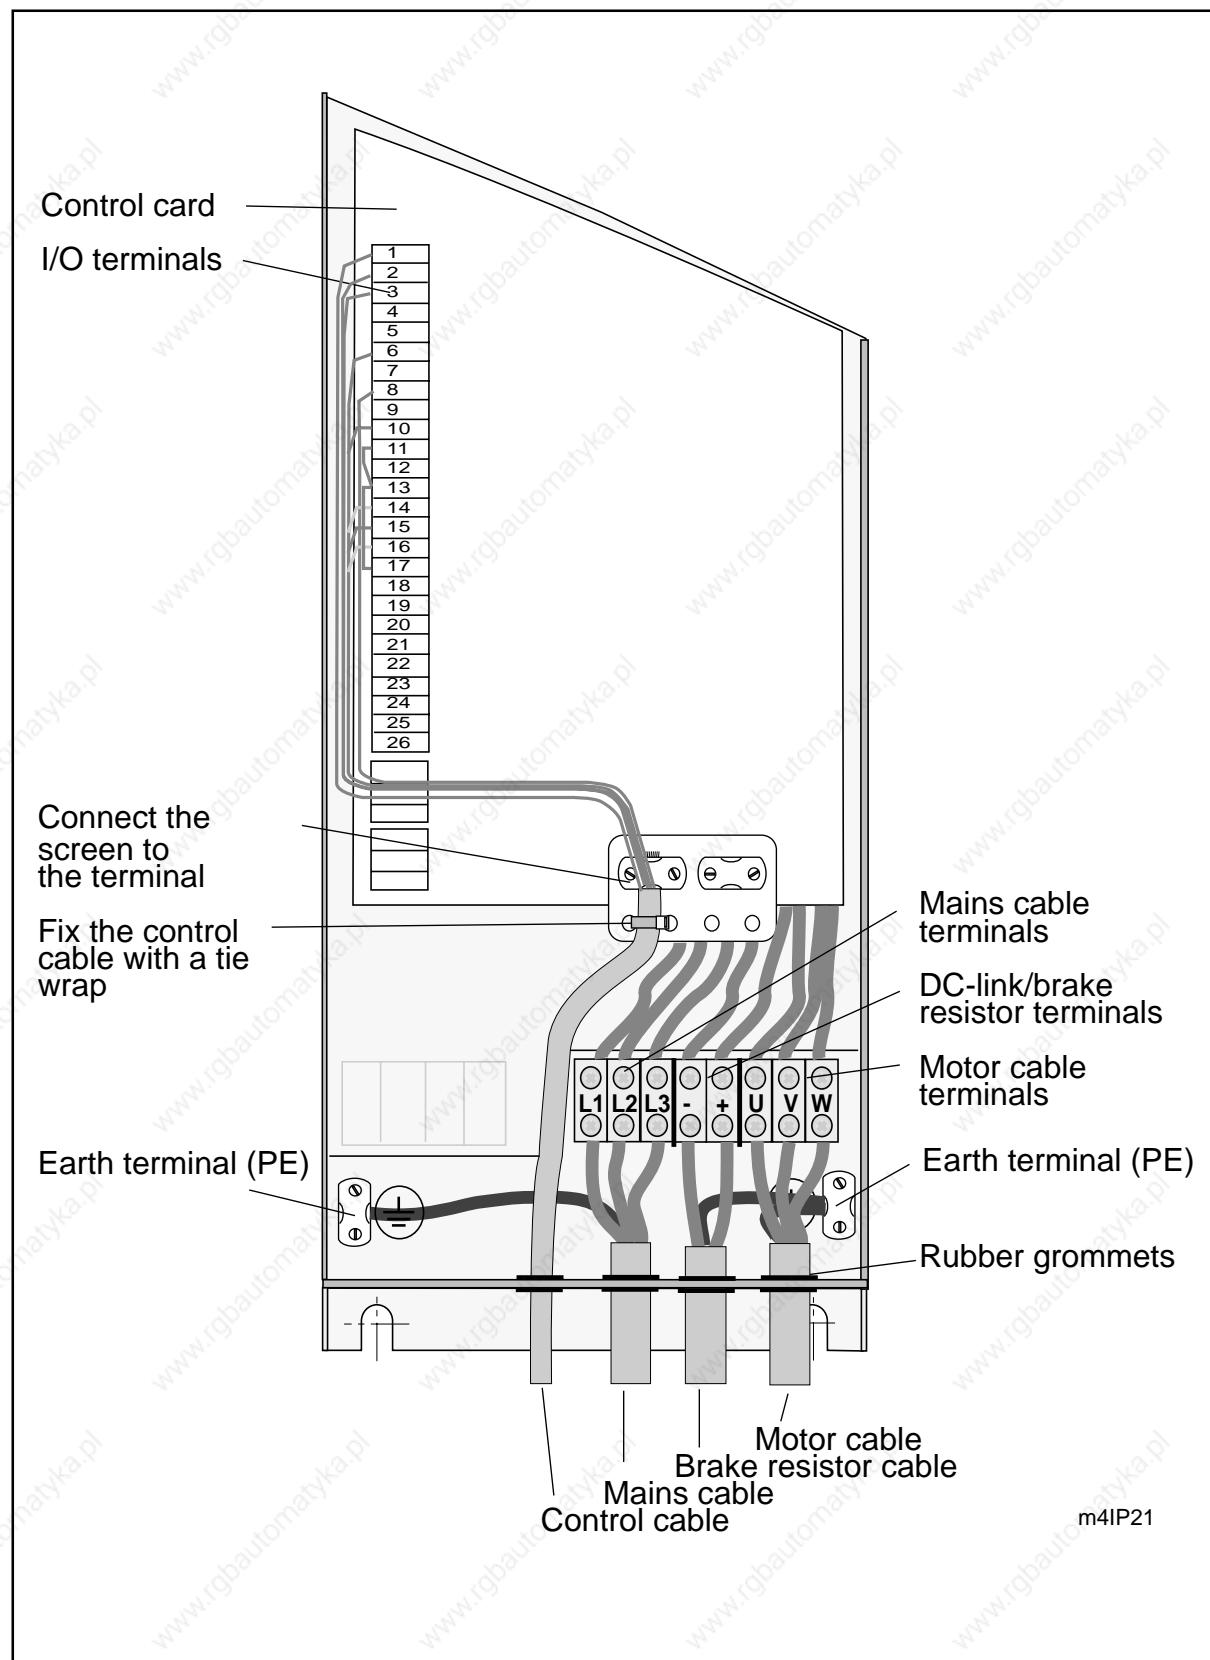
Cable assembly for 2.2–5.5 CXL4/CXL5 and 1.5–3 CXL2 types (EMC level N).
